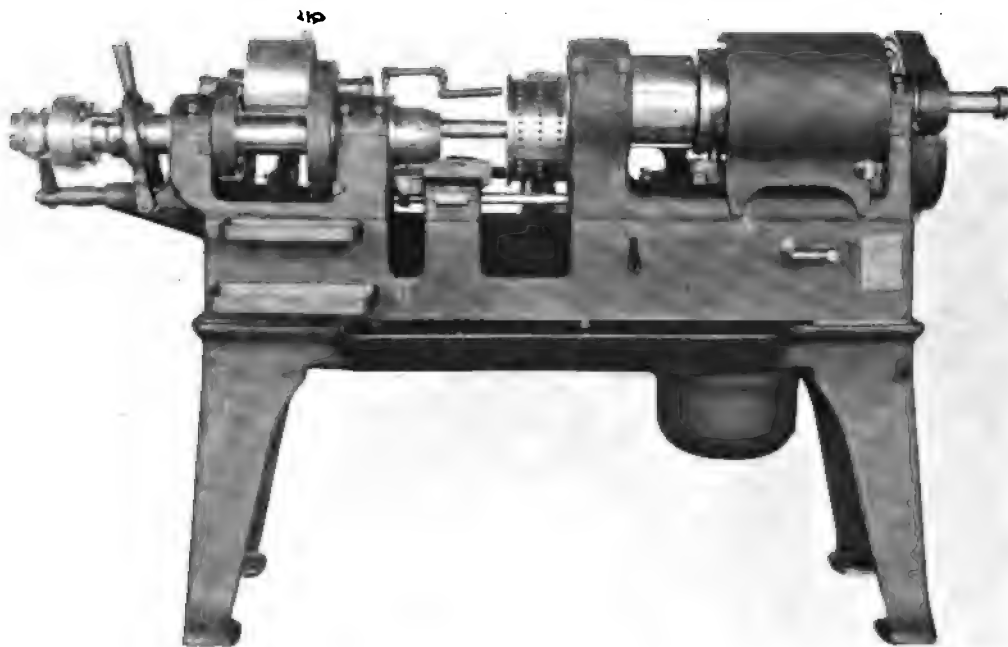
CLEVELAND AUTOMATIC SCREW MACHINE.
